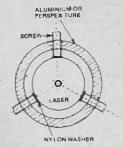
Proposed method of mounting the laser tube. If perspex tubing is used a reinforcing piece may be required (see photo of laser).
